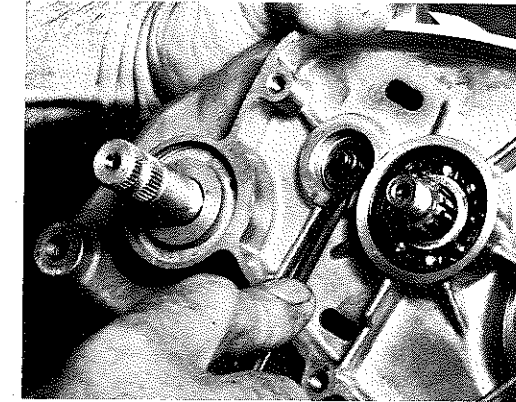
Using screwdriver to depress control shaft spring stopper.
